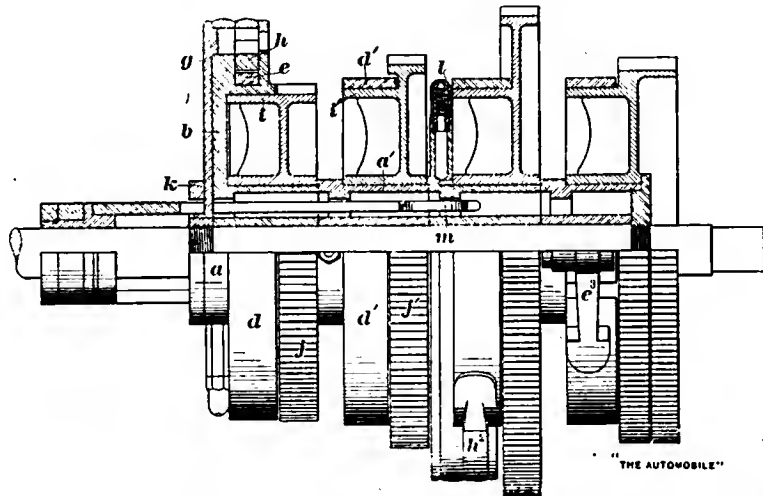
PART-SECTIONAL DRAWING OF LATEST FORM OF ABOVE SYSTEM.
